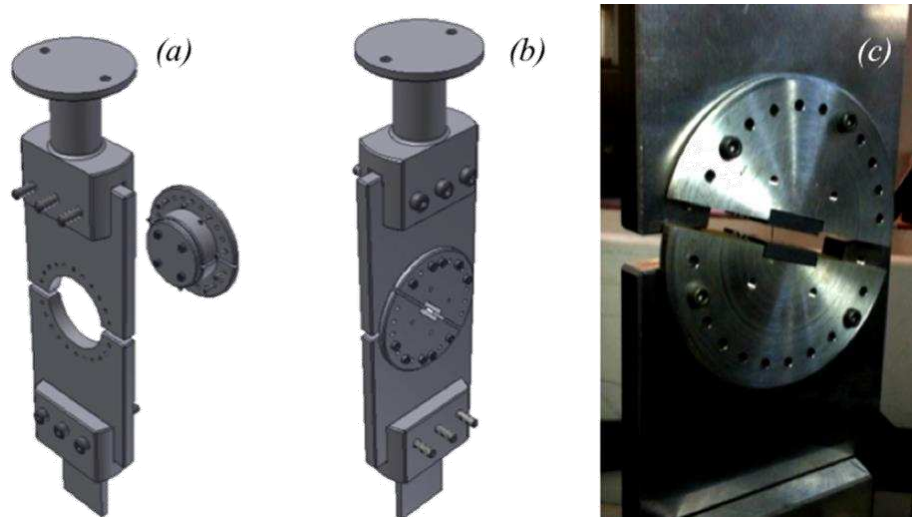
Arcan rig for single Z-pin testing; (a) back view; (b) front view; (c) assembled jig during a z-pin pull out test [12]
